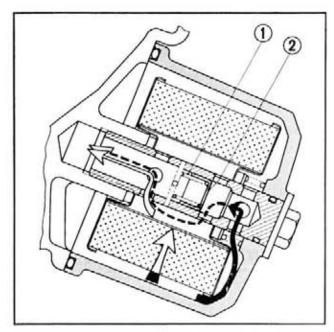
① By-pass valve spring ② By-pass valve
